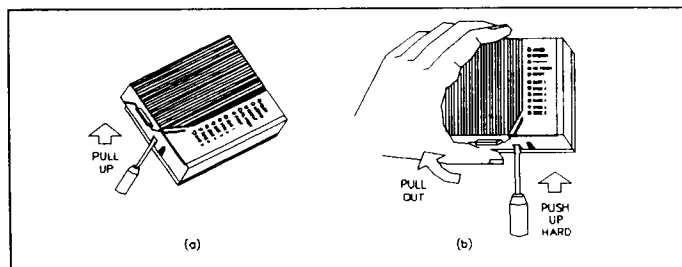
Removing keypad cover (a) before mounting and (b) after mounting on wall.
